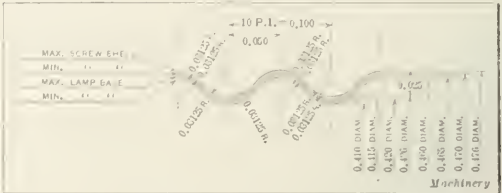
Candelabra Size Lamp-base and Socket Thread
